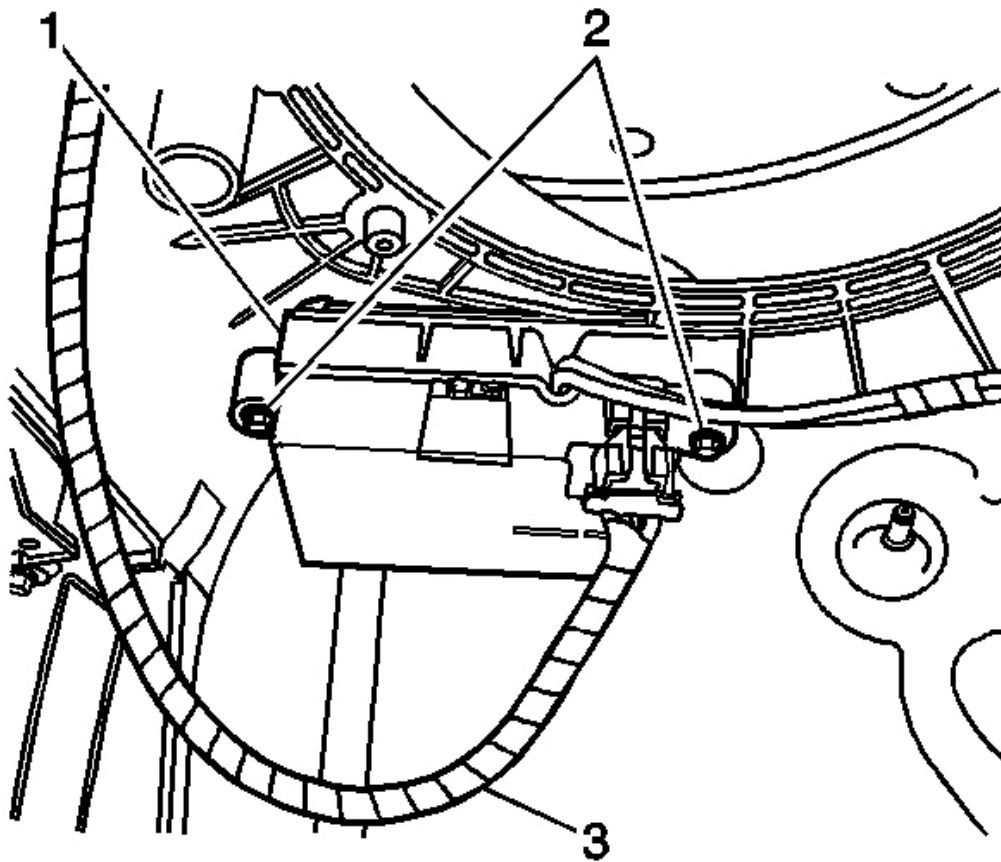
View Of Electrical Connector, Blower Motor Control Processor & Mounting Screws
